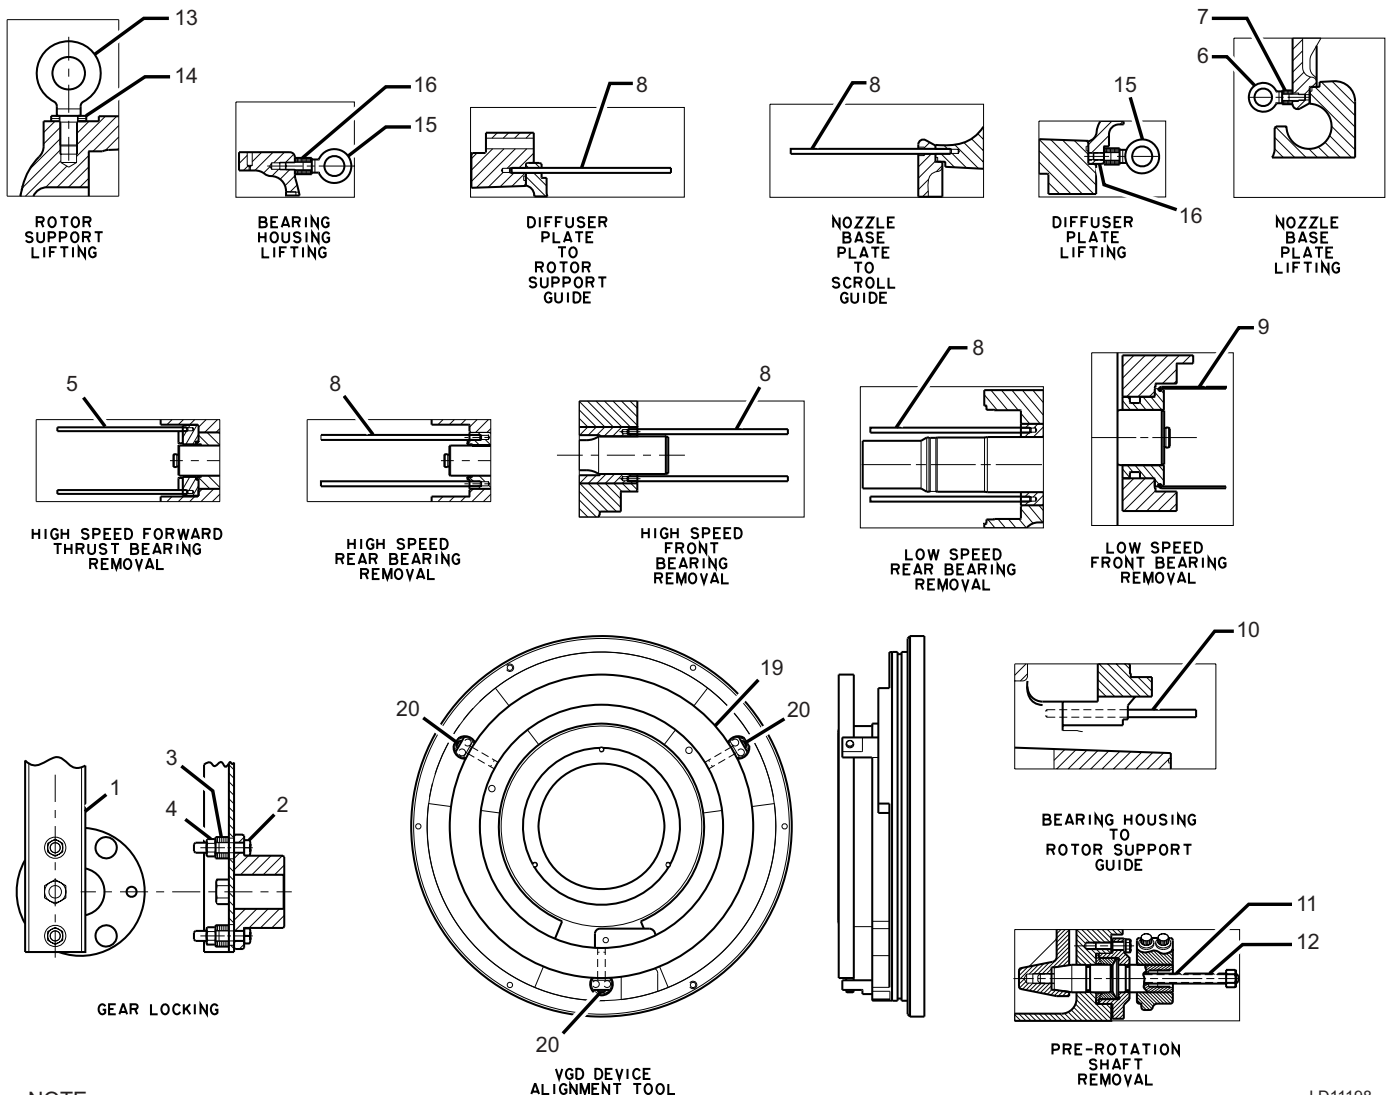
USE OF COMPRESSOR TOOLS (-61)
